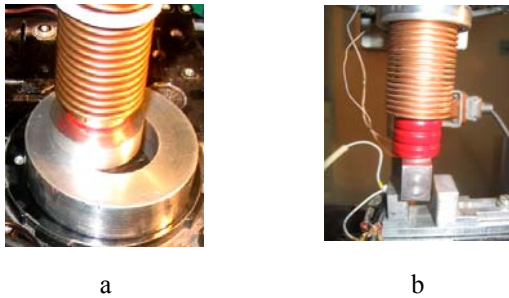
Initial part-to-part position at the beginning of alignment: a – parts of circular cross-section contacting at two points; b – parts of rectangular cross-section, edge contacting
